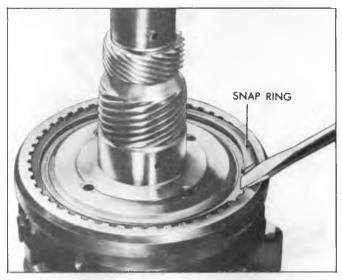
T--Removing Output Shaft to Carrier Snap Ring
